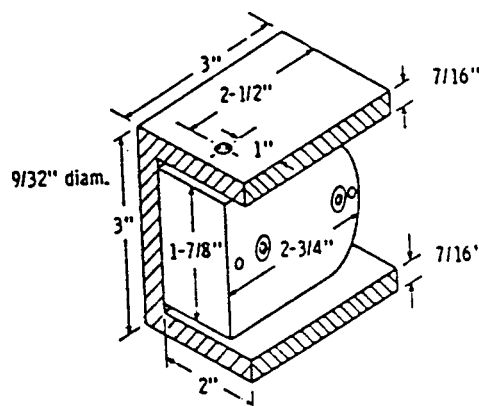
Jig for Positioning Holes in the U-Bend Specimen
